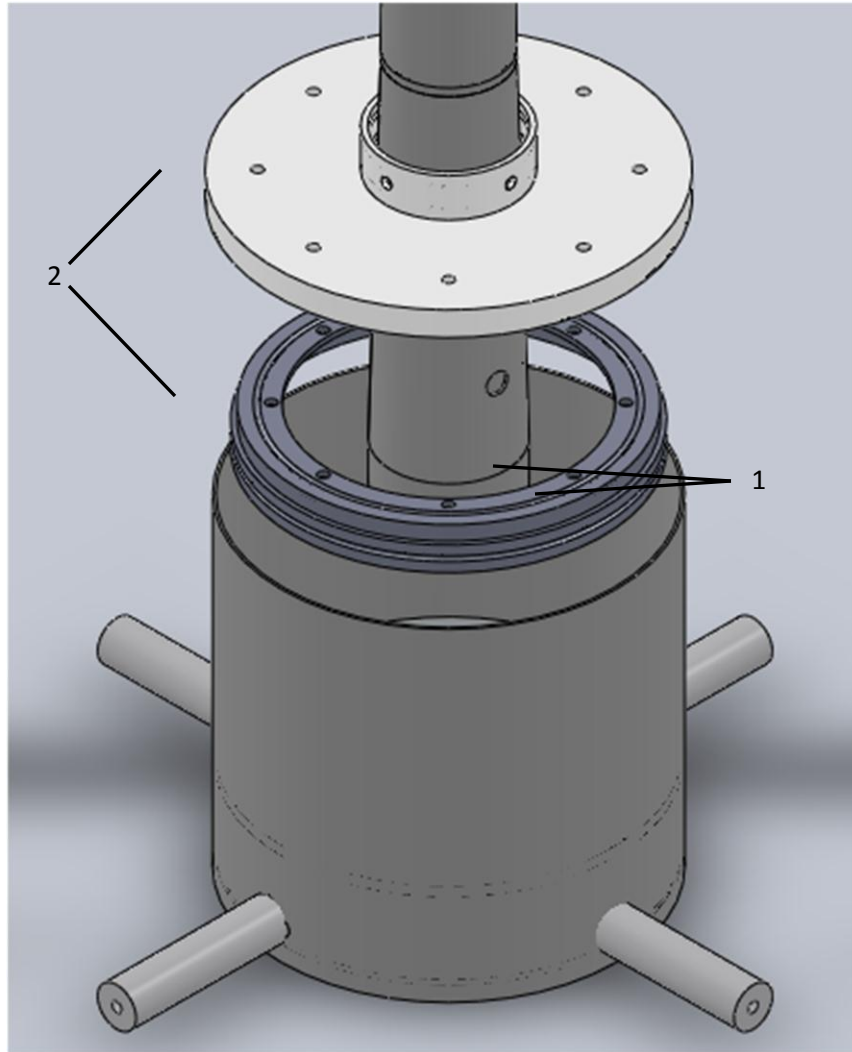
TLP tank, ledge, and lid (exploded view). The ledge contains O-ring channels that, with O-rings installed, ensure a water tight closure of the tank. 1- O-ring channels, 2- Mating holes in TLP lid and ledge for water tight assembly
